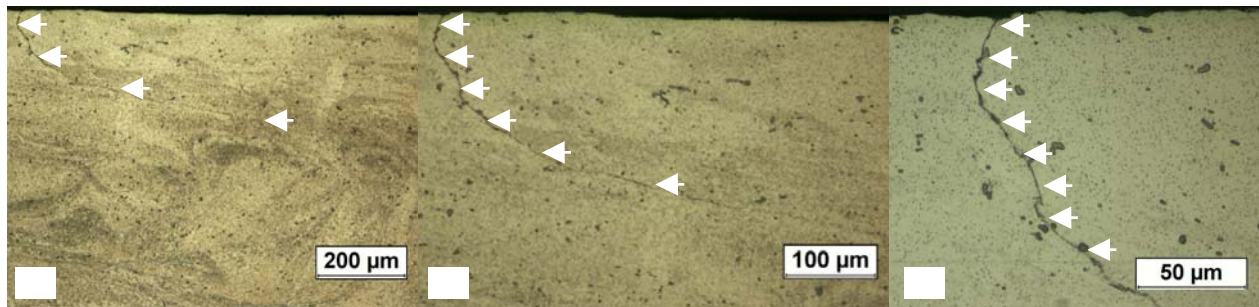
Transversal FS weld macrography on AA6013-T4 with typical root defects on butt joint.
